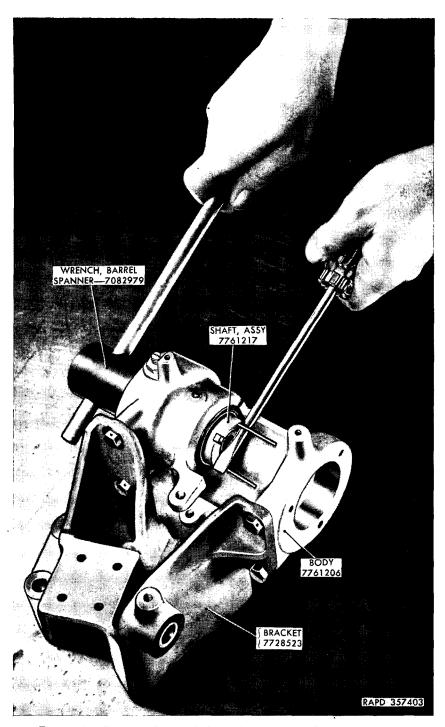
Removing bearing lock nut from gunner's shifter control shaft.
